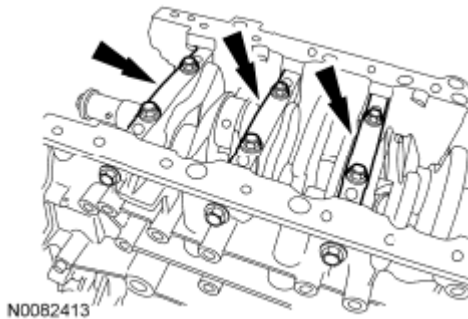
Identifying No. 1, No. 2 & No. 3 Main Bearing Caps On Cylinder Block
